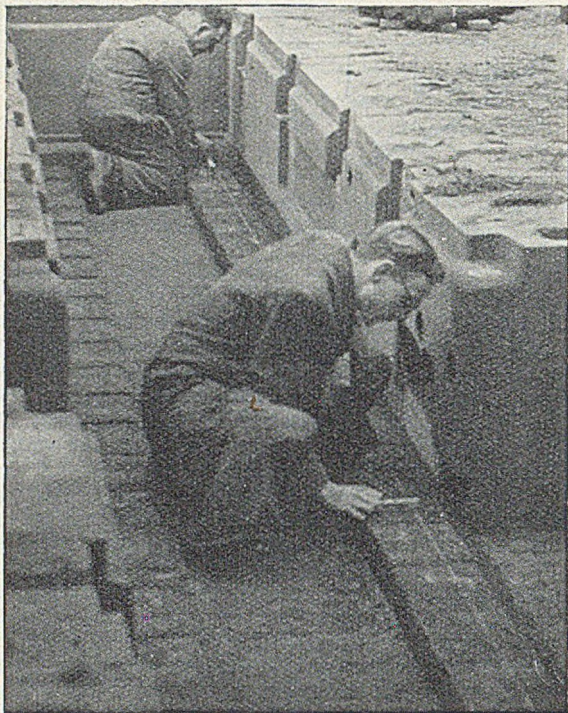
Checking Camber in the Same Mould as Fig. 11 after Setting the Chills for the Slideways.
